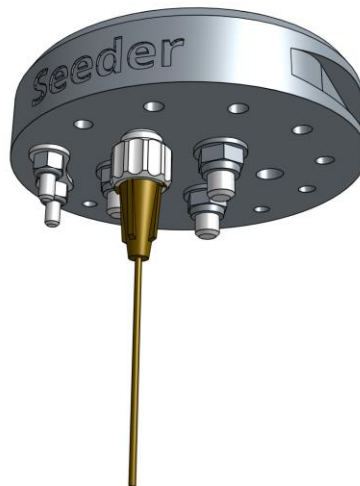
The original seed injector tool head with a Luer Lock style needle.
